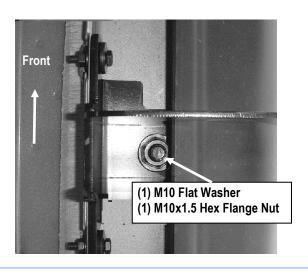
M10 Bolt Plate Installed on Driver Side Front Mounting Location
